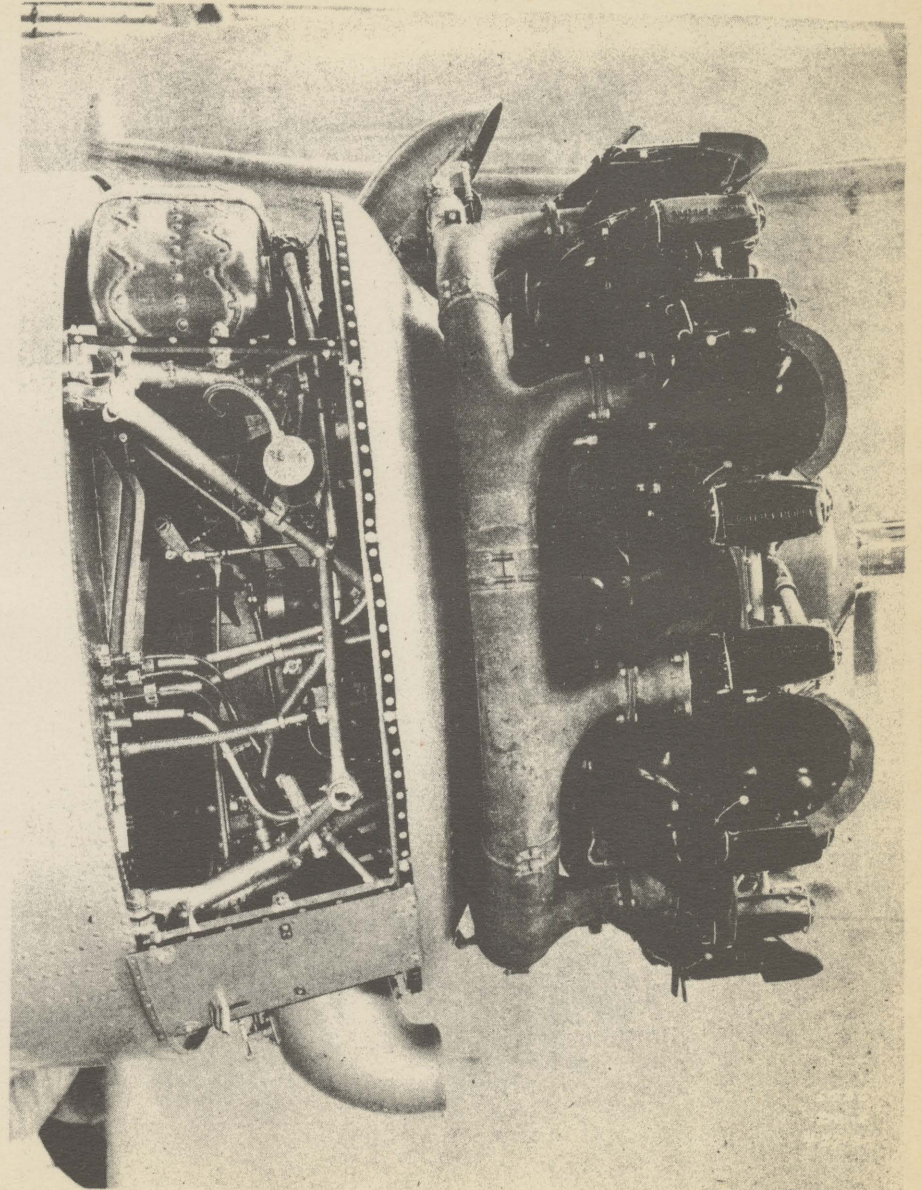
RIGHT HAND ENGINE SECTION , RIGHT SIDE
